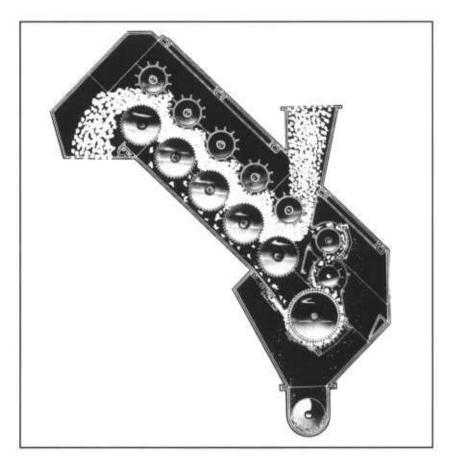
Four-cylinder air line cleaner (courtesy of Consolidated Cotton Gin Co., Inc.)
